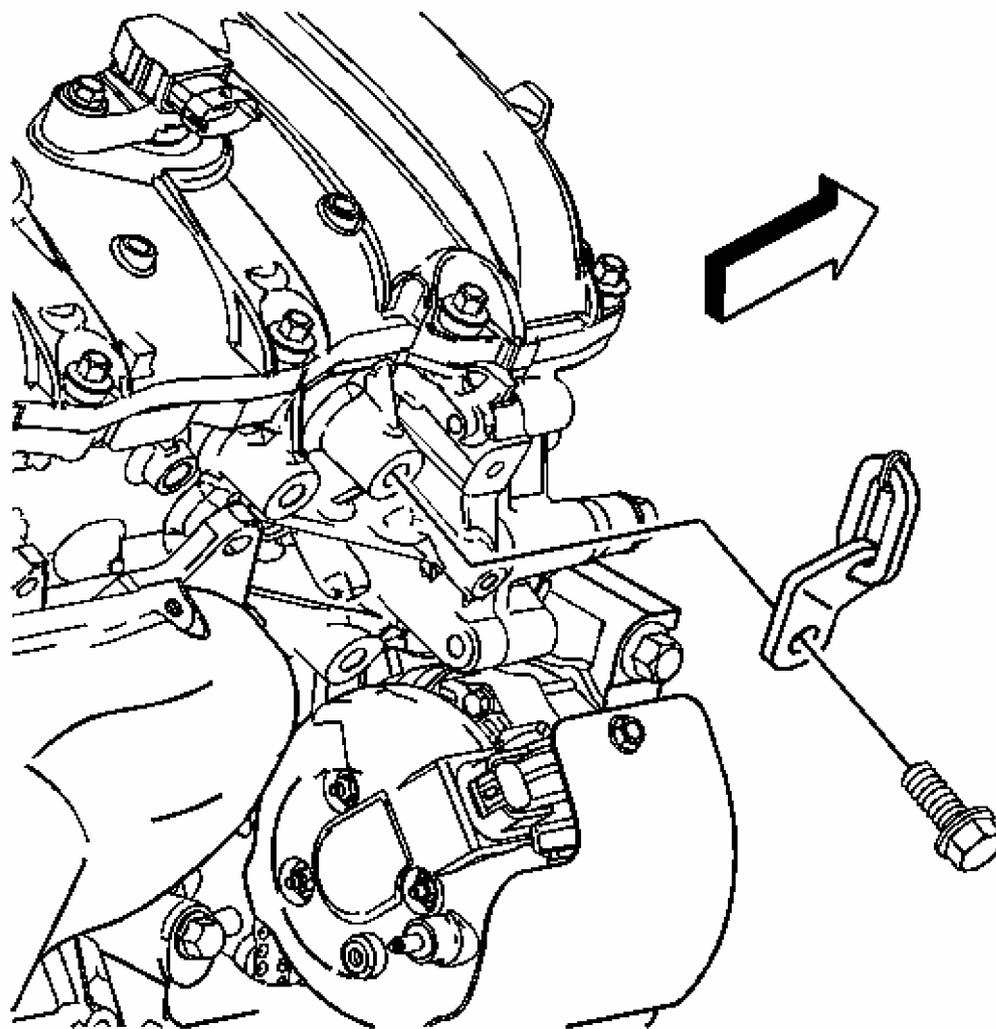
View Of Engine Lift Bracket - Front Of Right Cylinder Head
